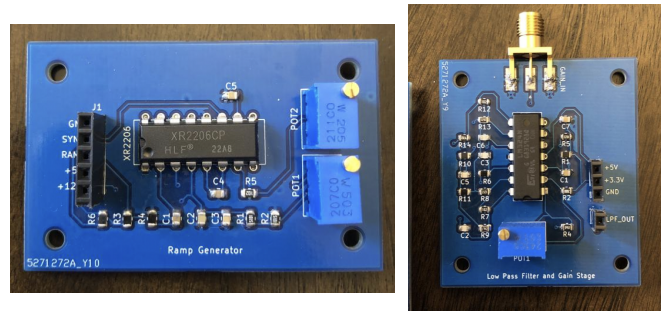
(left) Modulator PCB; (right) Low Pass Filter and Gain Stage PCB
